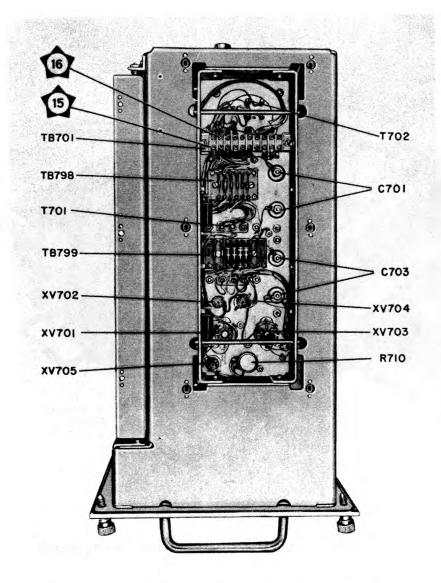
Coder-Indicator KY-382/GRN-9D, Top View
